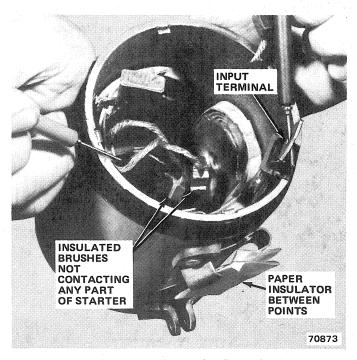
F-16 Hold-In Coil Winding Resistance Test
